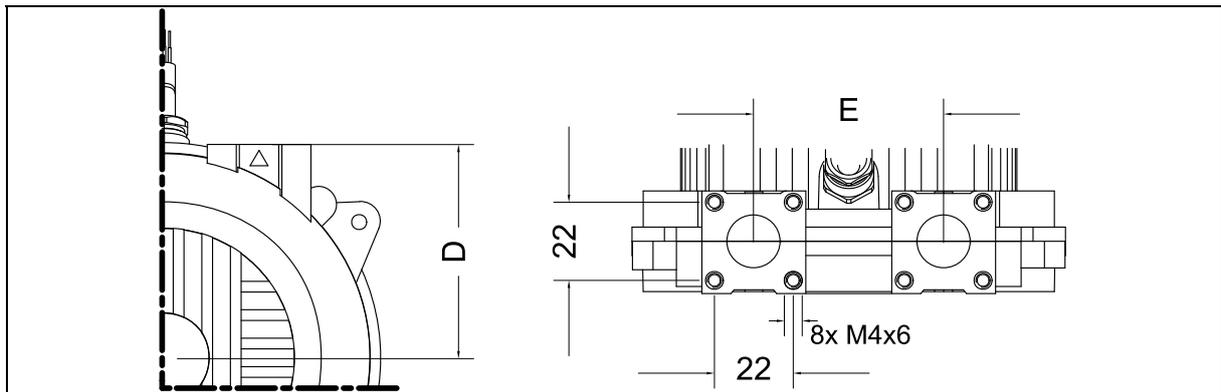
Dimensions of the 2BH1002-1.... (flange connection)
